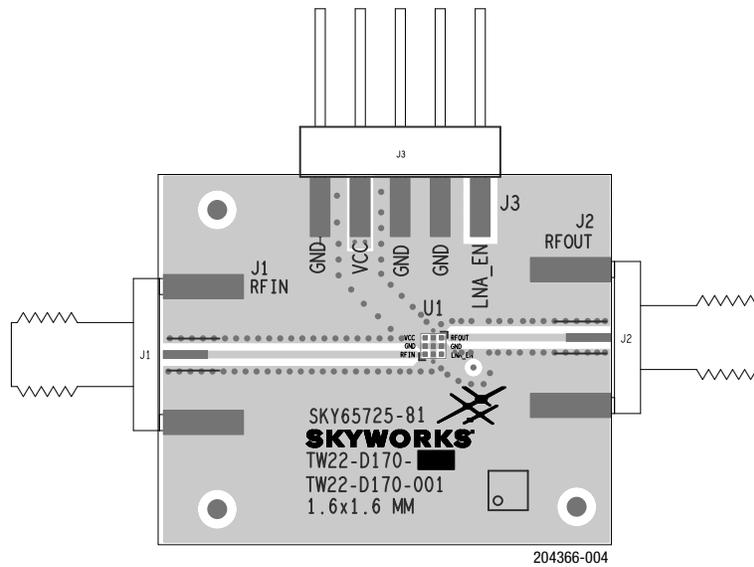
SKY65725-81 Evaluation Board Assembly Diagram
